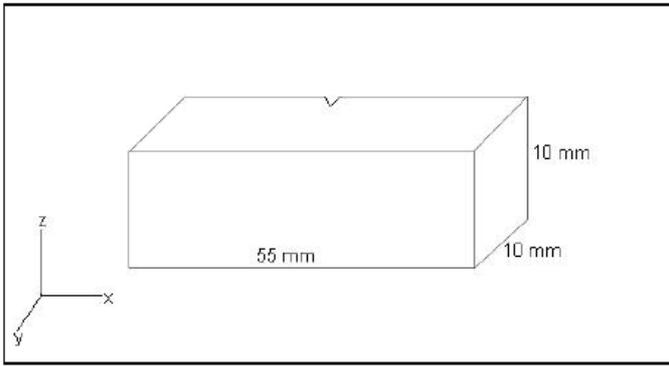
Specimen geometry – ASTM standard V-notch Charpy test specimen [1].
